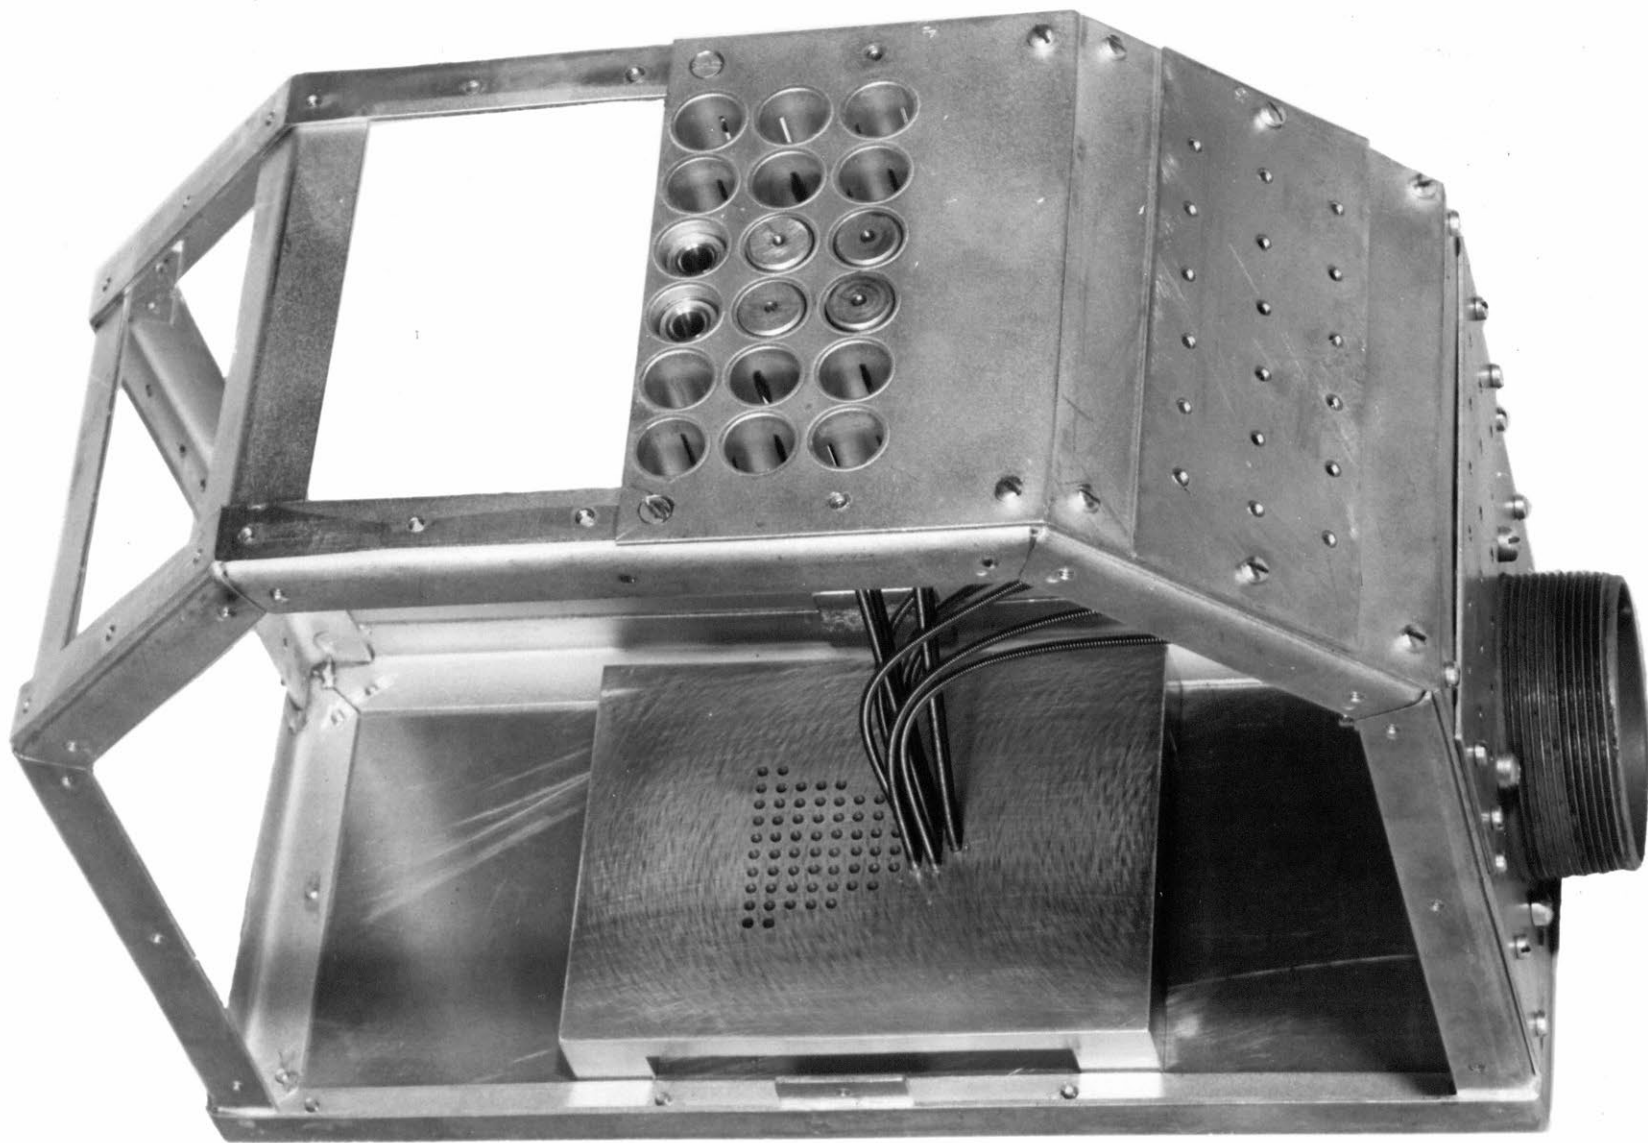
Pegboard unit: Frame, panels, cable receiver plate.
